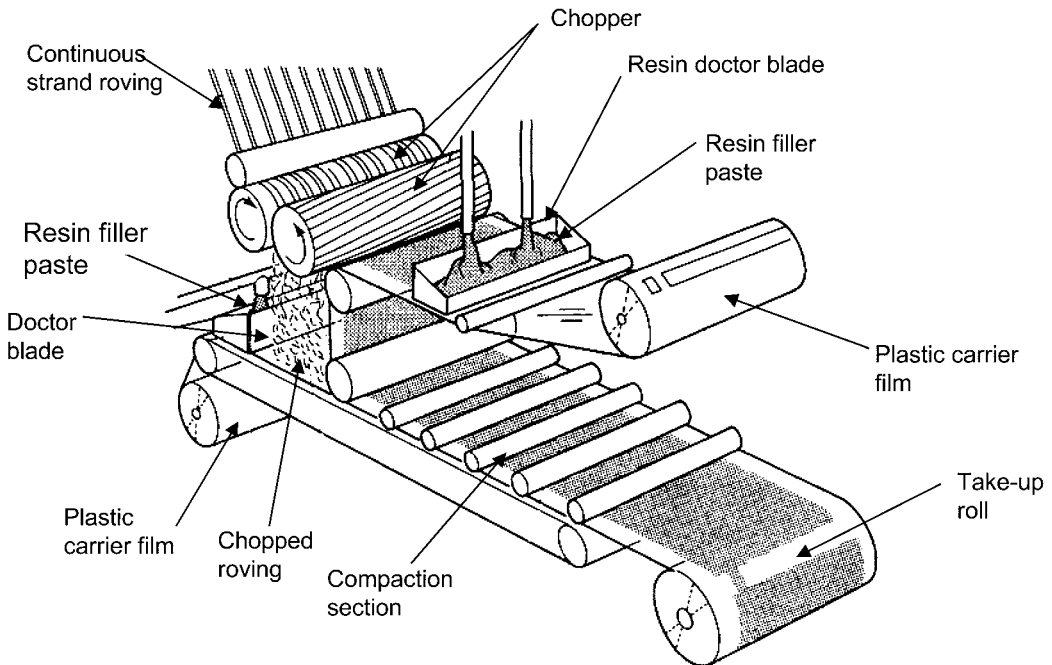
Sheet molding compound machine. Source: Ref 6
